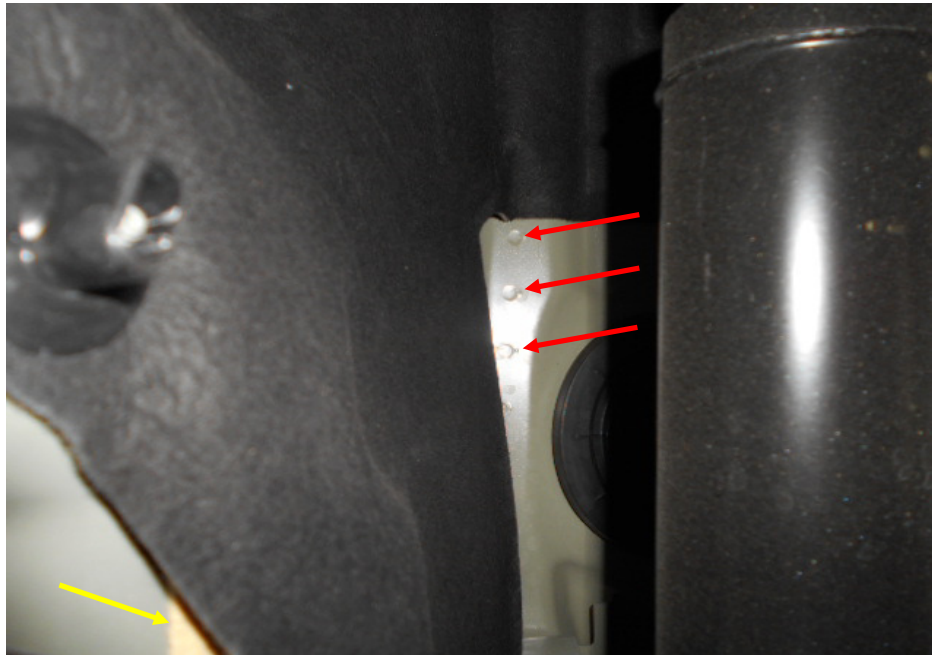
shows the structural body/floor panel at the centre of the Motor Car. I did not find any weld marks, other than original spot weld marks (red arrow), on the body panels of the Motor Car. The original factory sealant (yellow arrow) at the joints along the structural body/floor panel were also untouched, indicating no work was done on the structural body/floor panel of the Motor Car and that the structural body was originally fitted.
